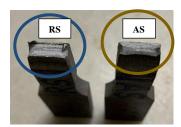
Fracture of A-SKEW tensile specimen at 1000 rpm
